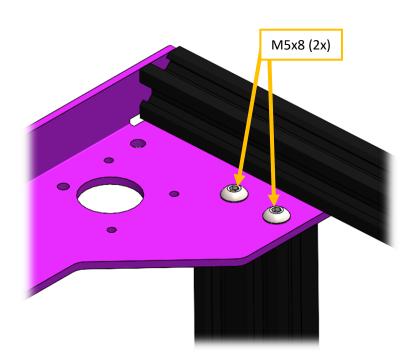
Back joint detail, M5x8 mm screw fixed to 2040 extrusion.
